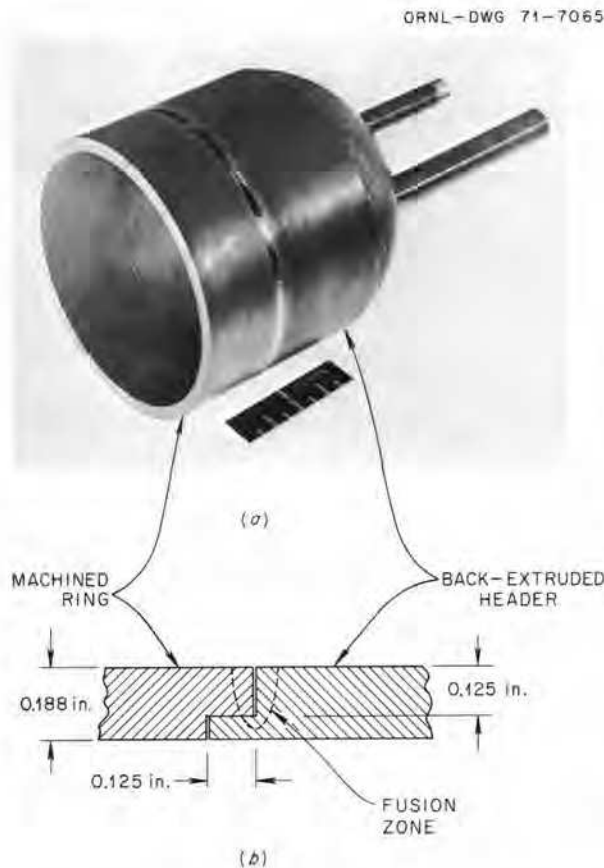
(a) Electron-beam girth weld on back-extruded molybdenum header; (b) joint design.
